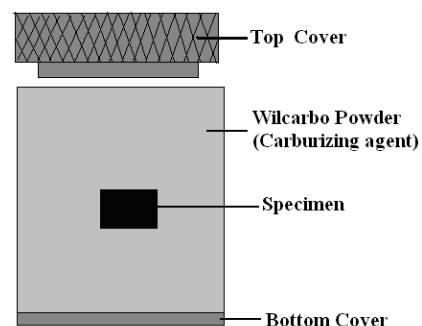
Schematic diagram of carburizing container containing the specimen to be carburized
